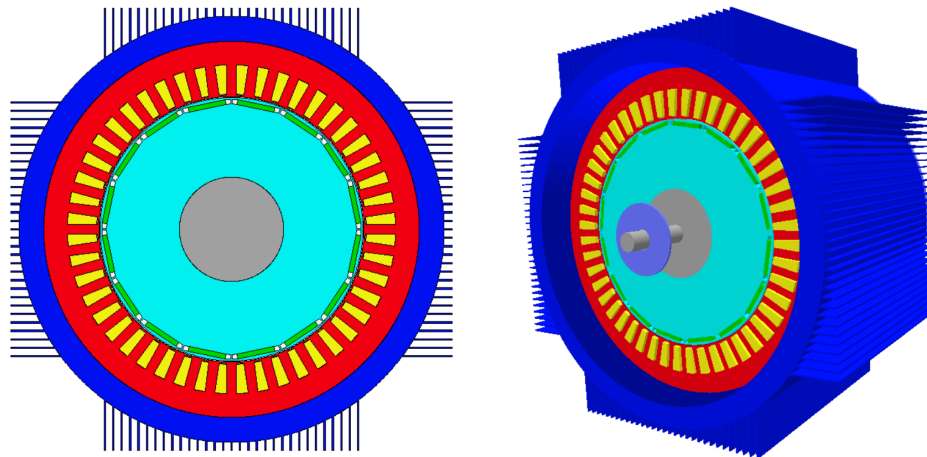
Cross section and side view of IPM machine designed in ANSYS Motor-CAD.
